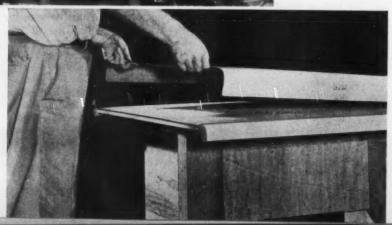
First step in production of cove type sink tops consists of bonding the laminated sheet to plywood by clamping the two together in a veneer press
